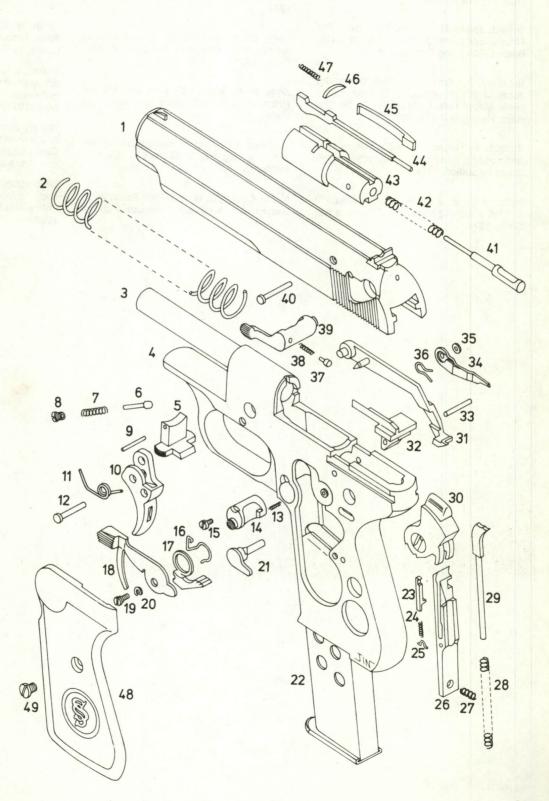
Exploded view of the Sauer Modell 38H. (Jimbo)
